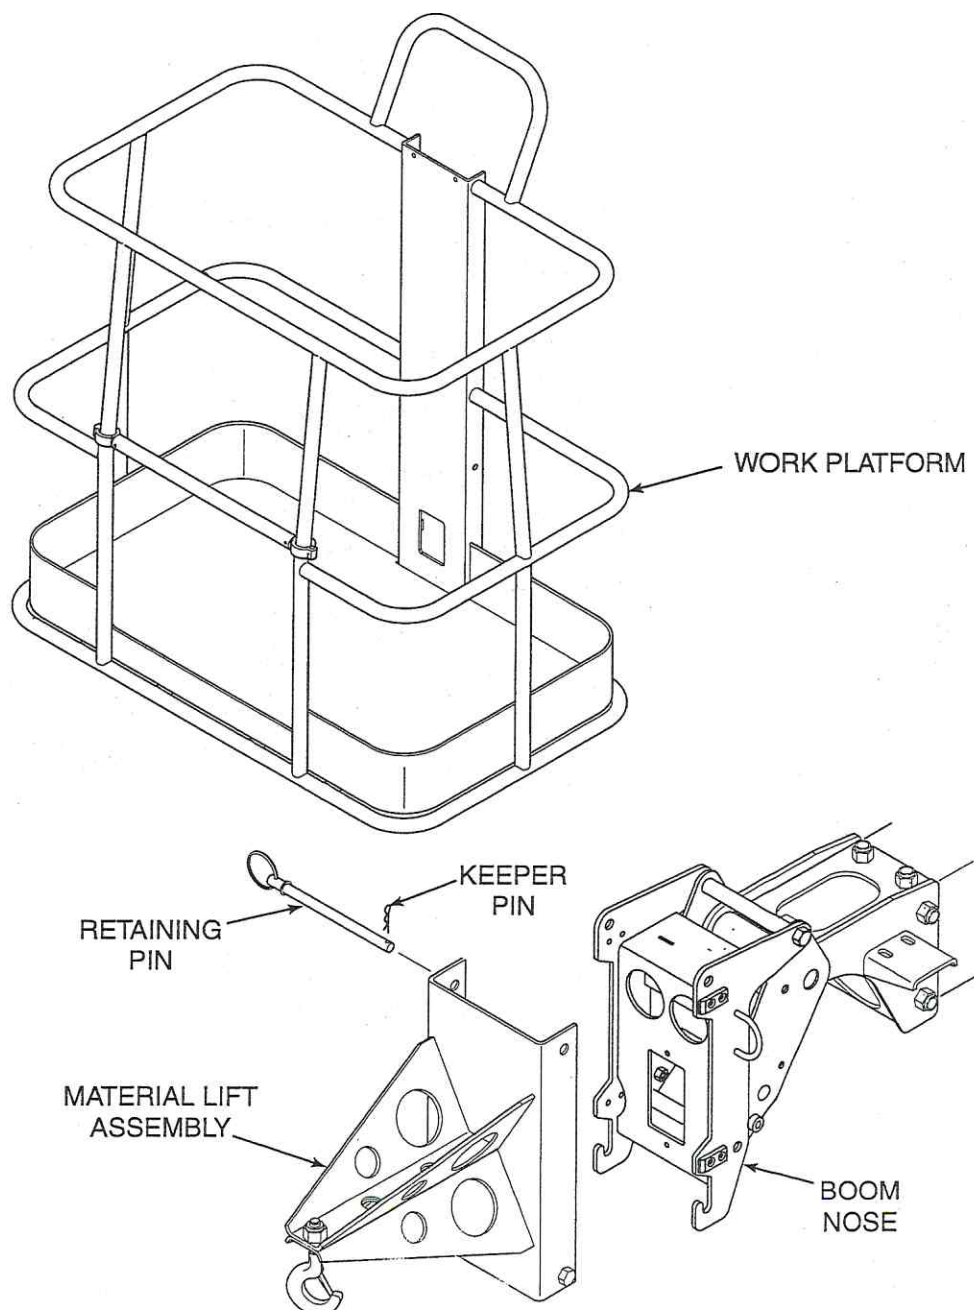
Remove/Install Work Platform and Material Lift Assembly
